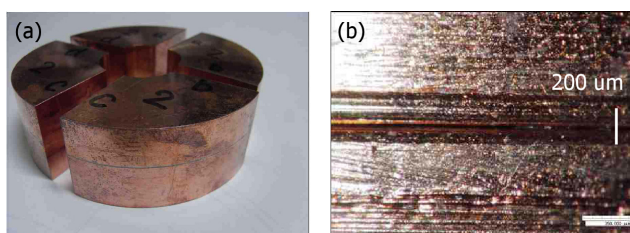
Test sample for brazing with 120 % filler metal. (a) Outer view of the test sample cut into four pieces and (b) close-up view of the inner surface at the brazing plane.
